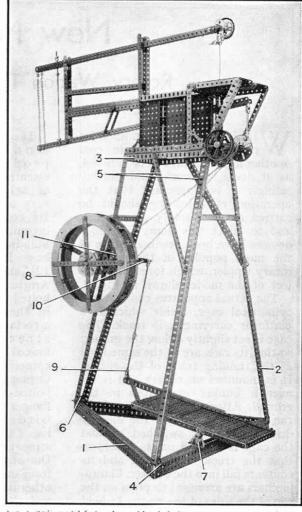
This model fretwork machine is built entirely from Meccano parts and can be used for actual fretcutting
